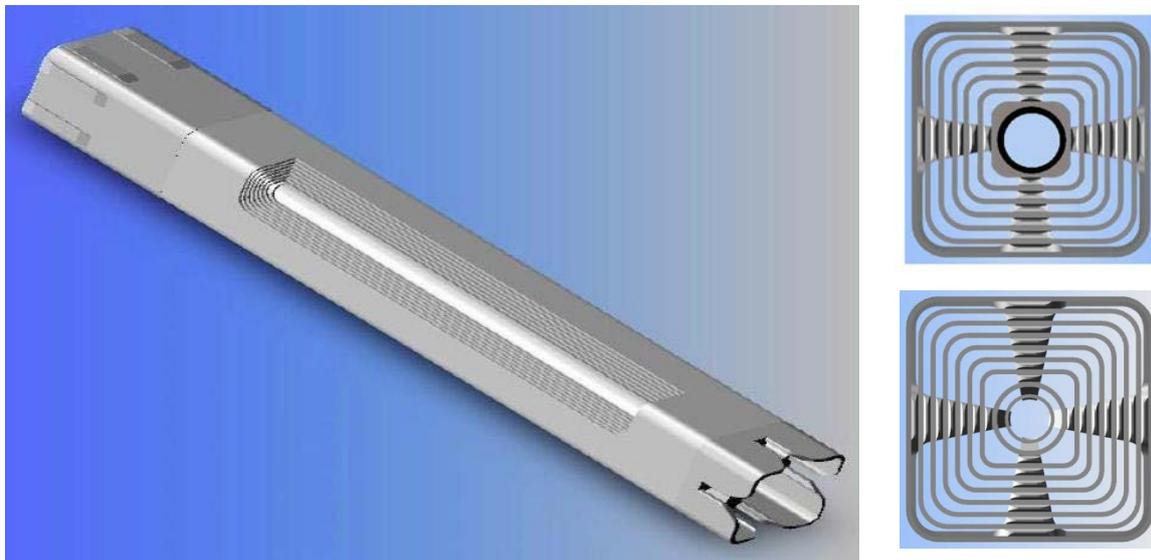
IRT-3M fuel assembly with 6 (top right) and 8 (bottom right) concentric tubes.
